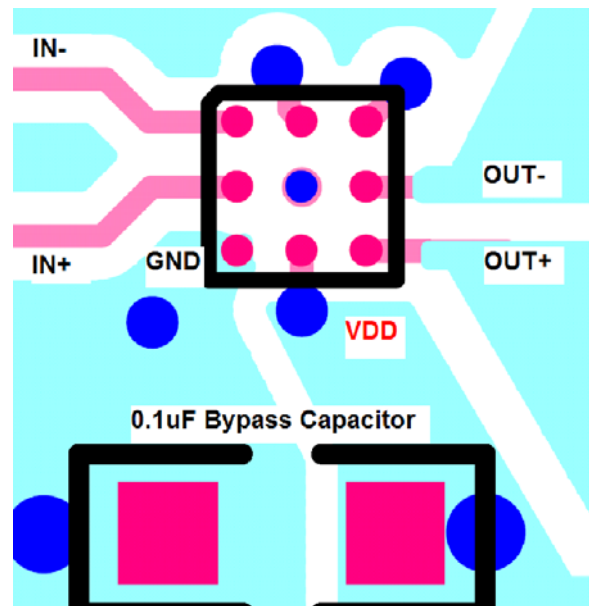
Preferred PCB Layout for the SSM2319 Evaluation Board
